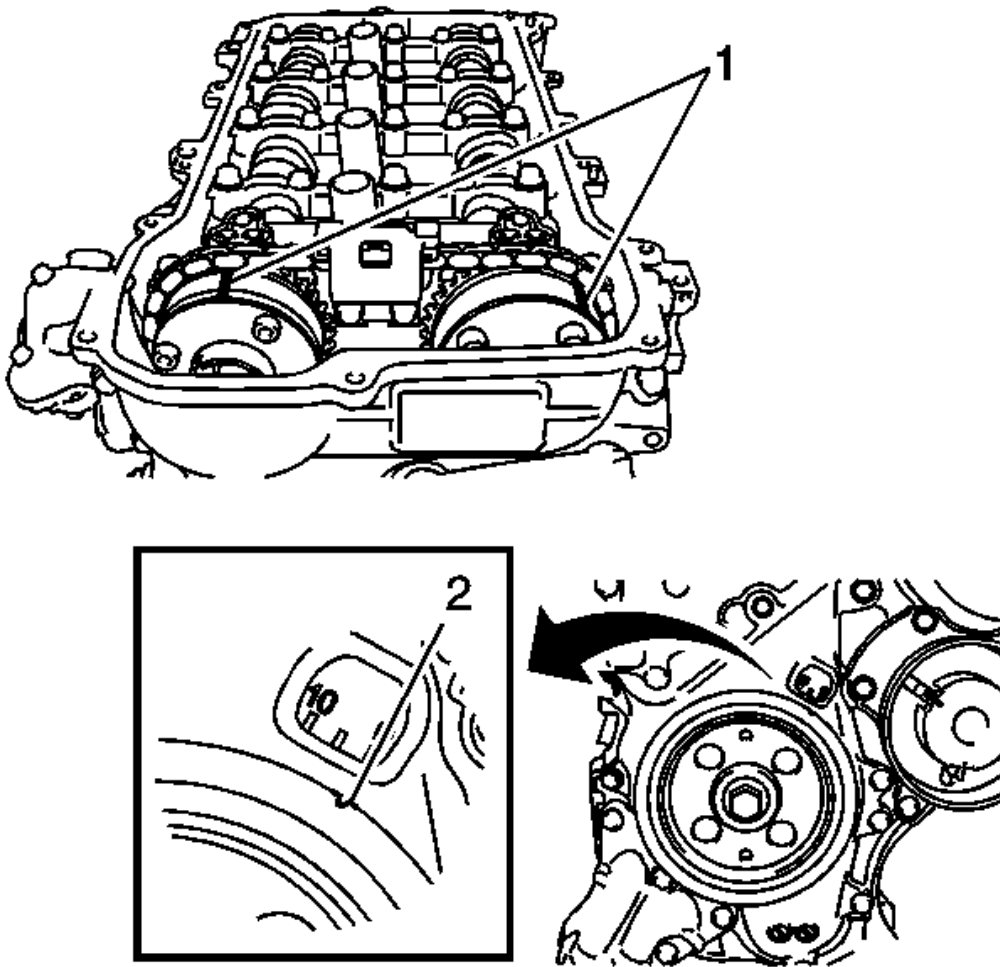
Setting No. 1 Cylinder To TDC/Compression Stroke
